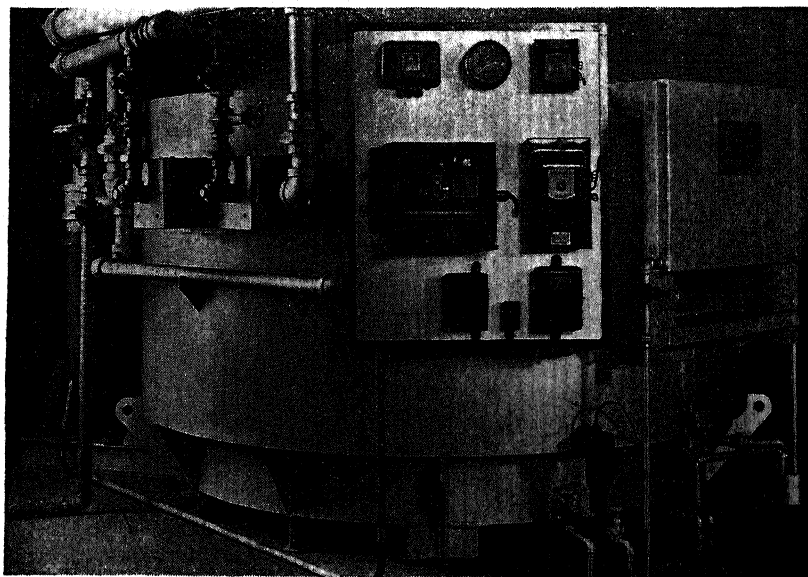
Rotary forging furnace with water seals and syphon vents. Diameter 7 ft.
